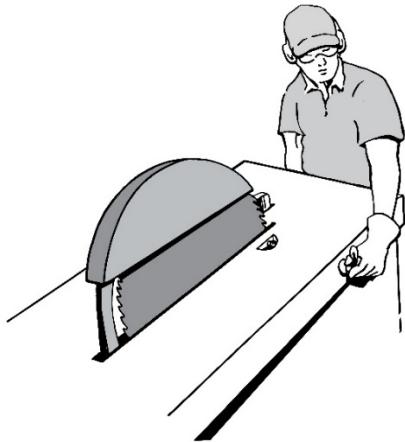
A remote packing adjustment keeps the operator well away from the moving saw blade.
